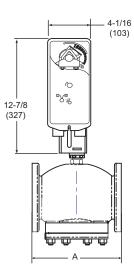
Mx41-715x-230 Actuator/Linkage Assembly
